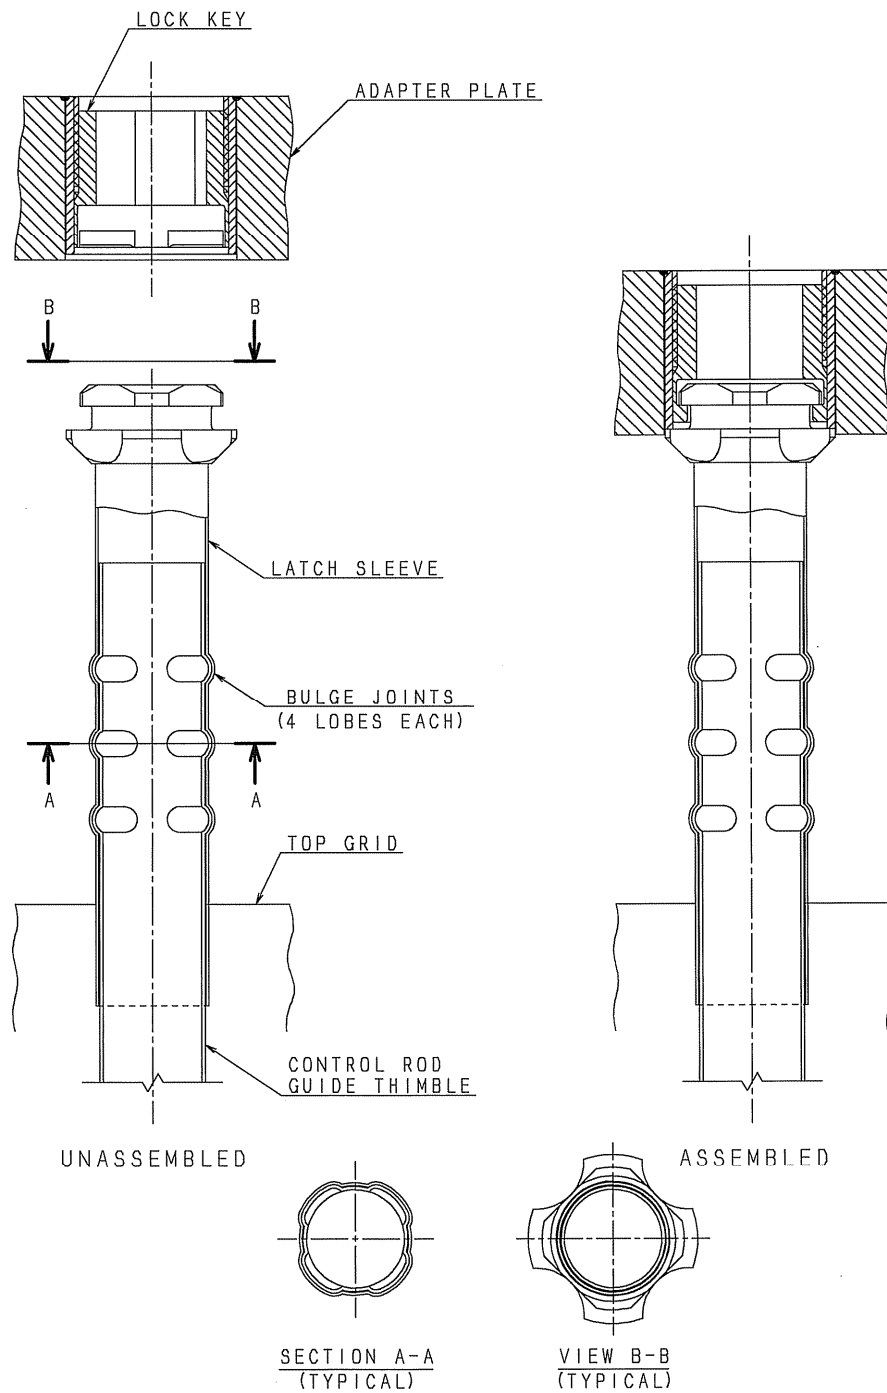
Control Rod Guide Thimble to Top Nozzle Joint
